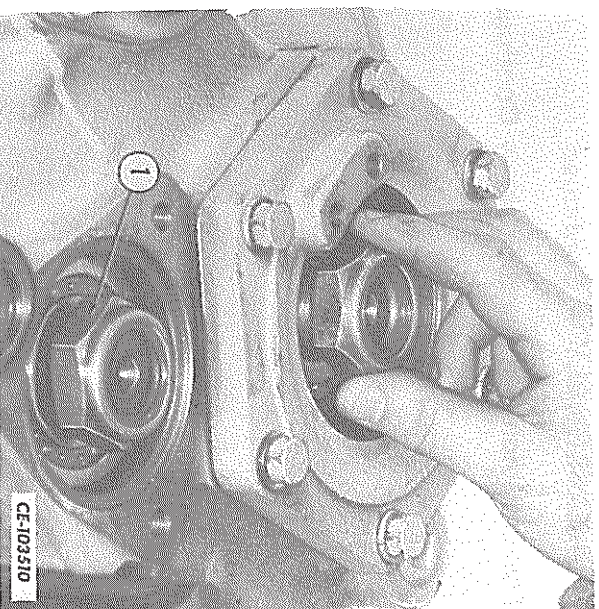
Installing the Pinion Shaft and Spline Shaft Front Nuts
